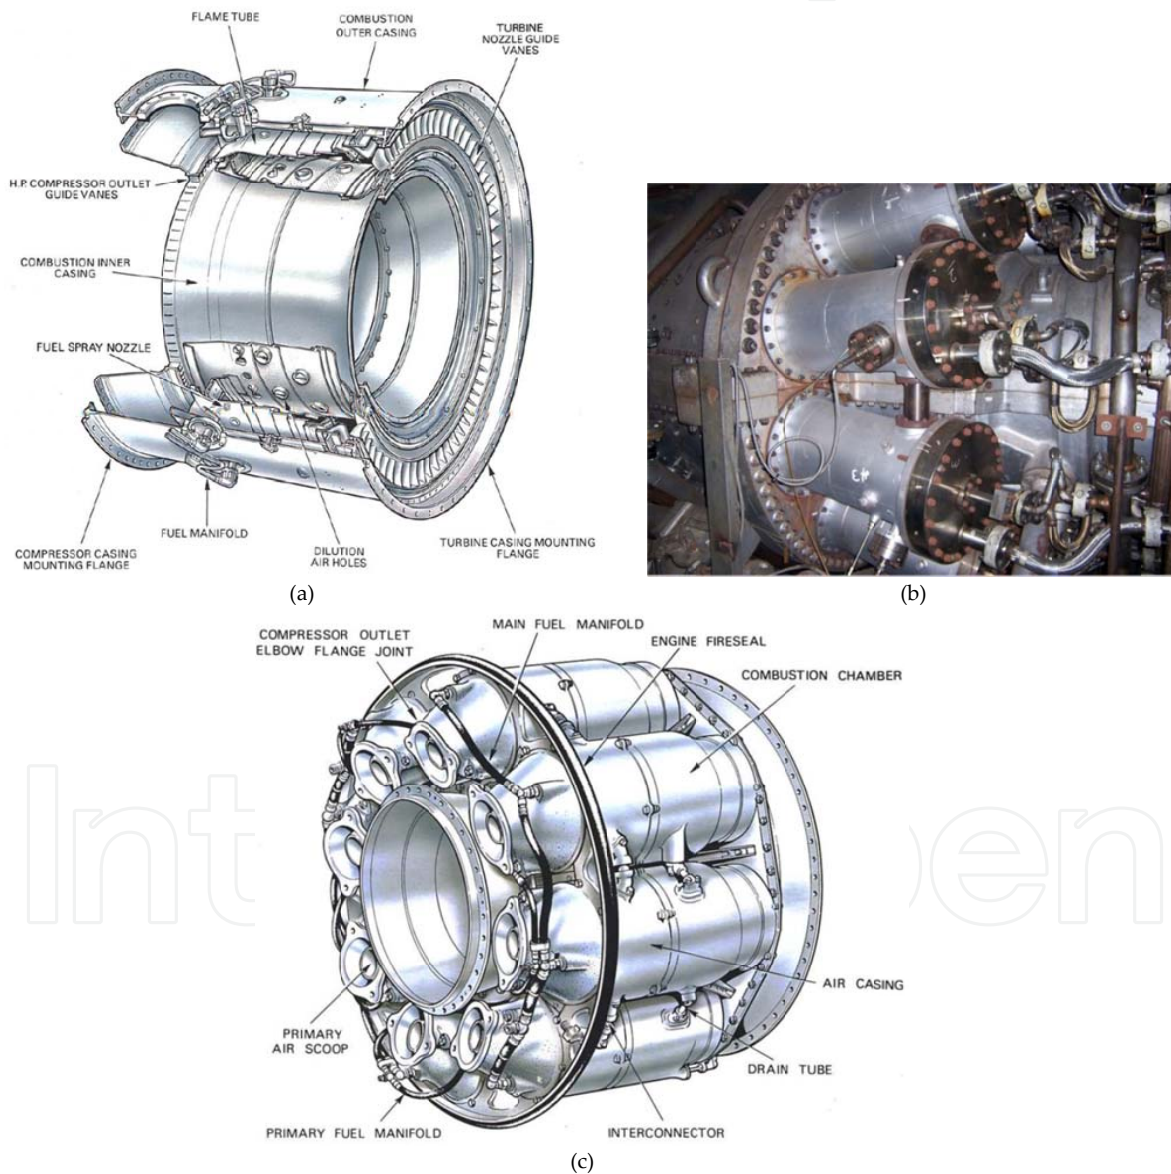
a: Annular combustion chambers [17] b: Gas turbine combustor arrangement [5] c: Several combustors arranged equidistant on the same pitched circle diameter, and each consists of an inner flame tube or liner cylinder mounted on the same axis inside an outer casing cylinder, called tubular combustors [18]
